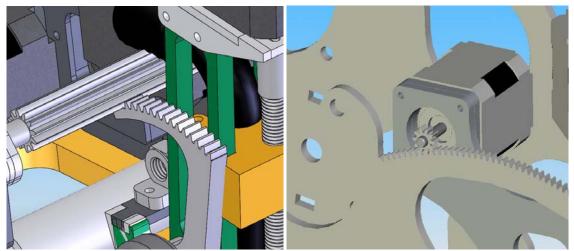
Intermediate gearing of the angular movement and the second version with direct drive.
